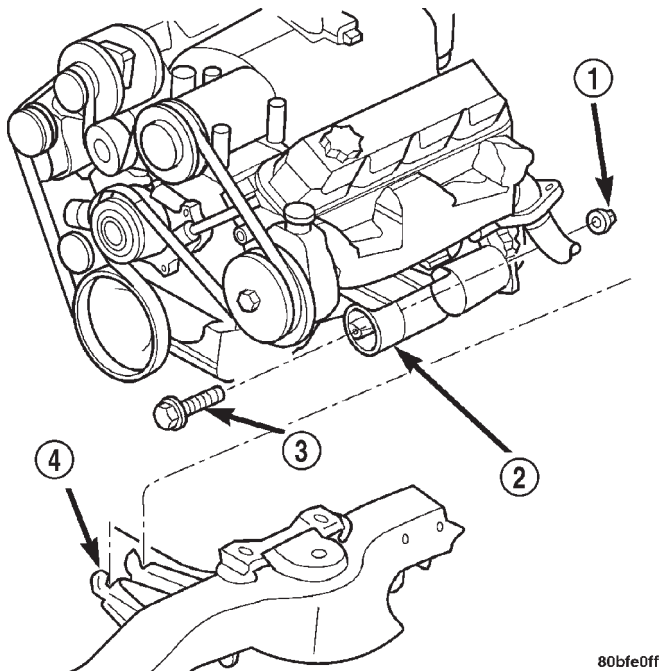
Engine Mount Through Bolt and Nut Removal / Installation
